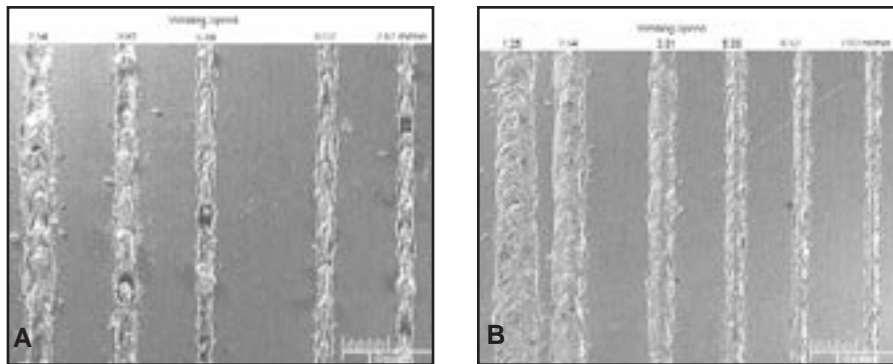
Partial-penetration, bead-on-plate aluminum welds (5052 aluminum alloy, CO₂ laser, welding speed: 1.25 to 7.62 m/min). A — Single beam; B — dual beam.
